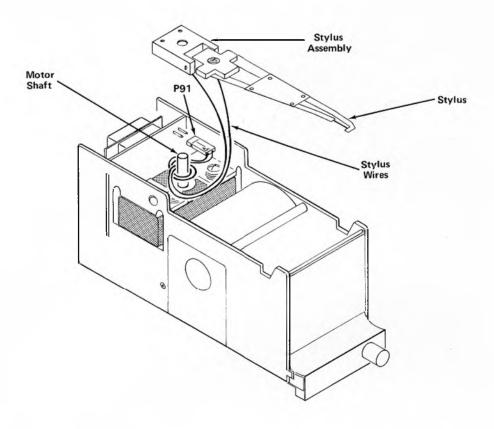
Correct alignment of stylus assembly connecting wire.
